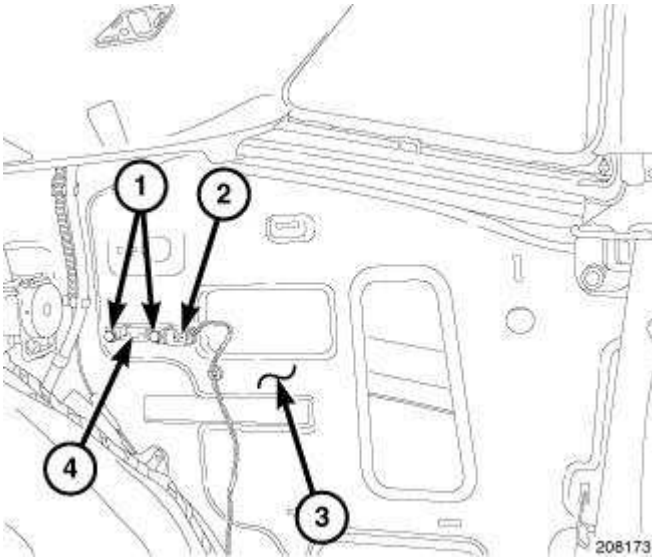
Identifying Retaining Screws, Side Impact Sensorelectrical Connector & Side Impact Sensor
